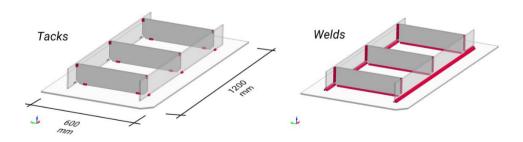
Dimension, tack welds and welds of test specimen
